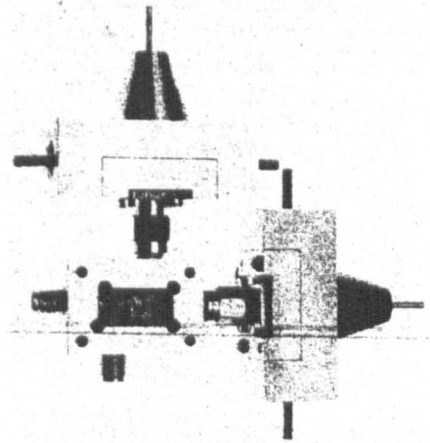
Assembly of two coaxial cavities and Wilkinson coupler
